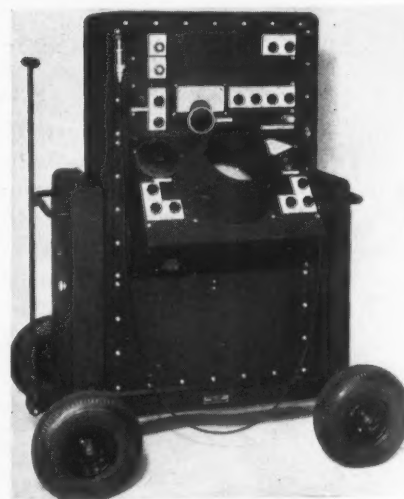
Supersonic testing equipment capable of penetrating massive sections up to about 15 feet.
